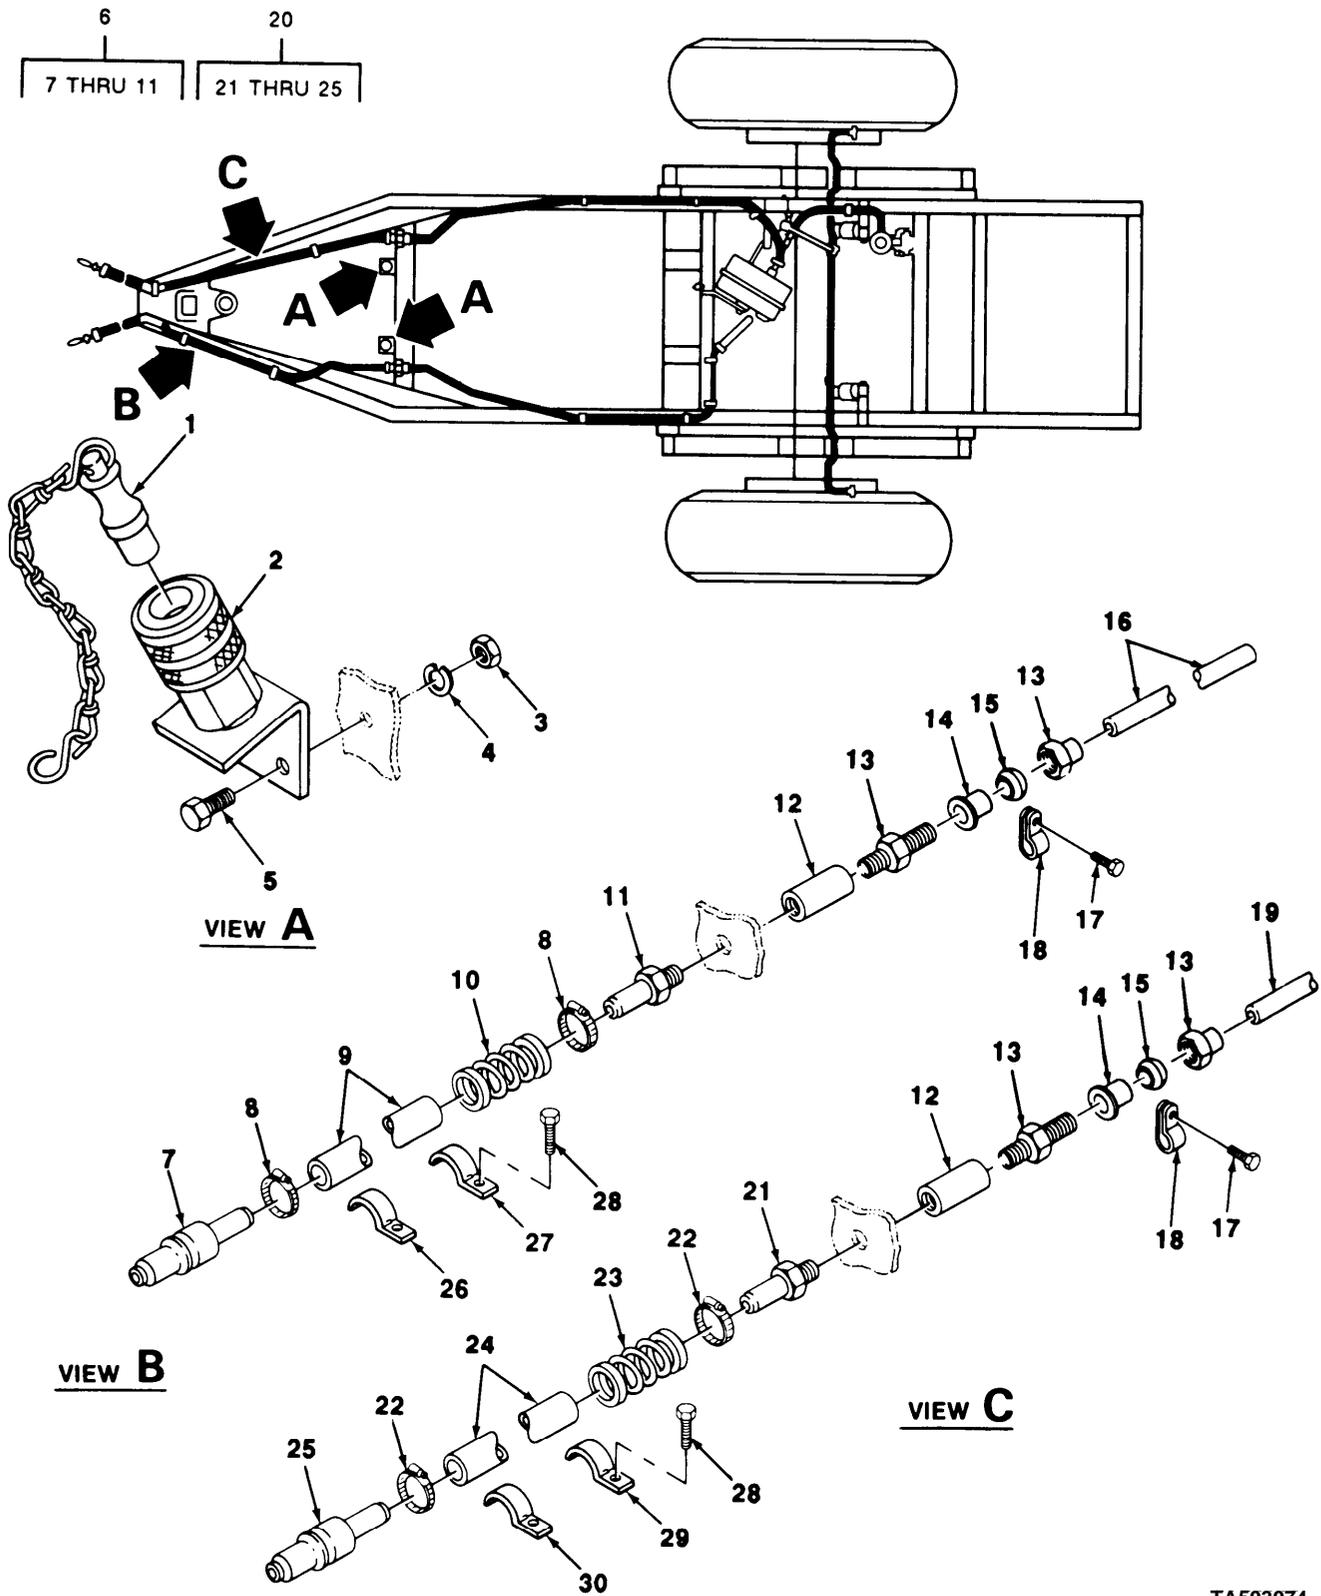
VACUUM HYDRAULIC BRAKE SYSTEM HOSE ASSEMBLY (M105A2C),
